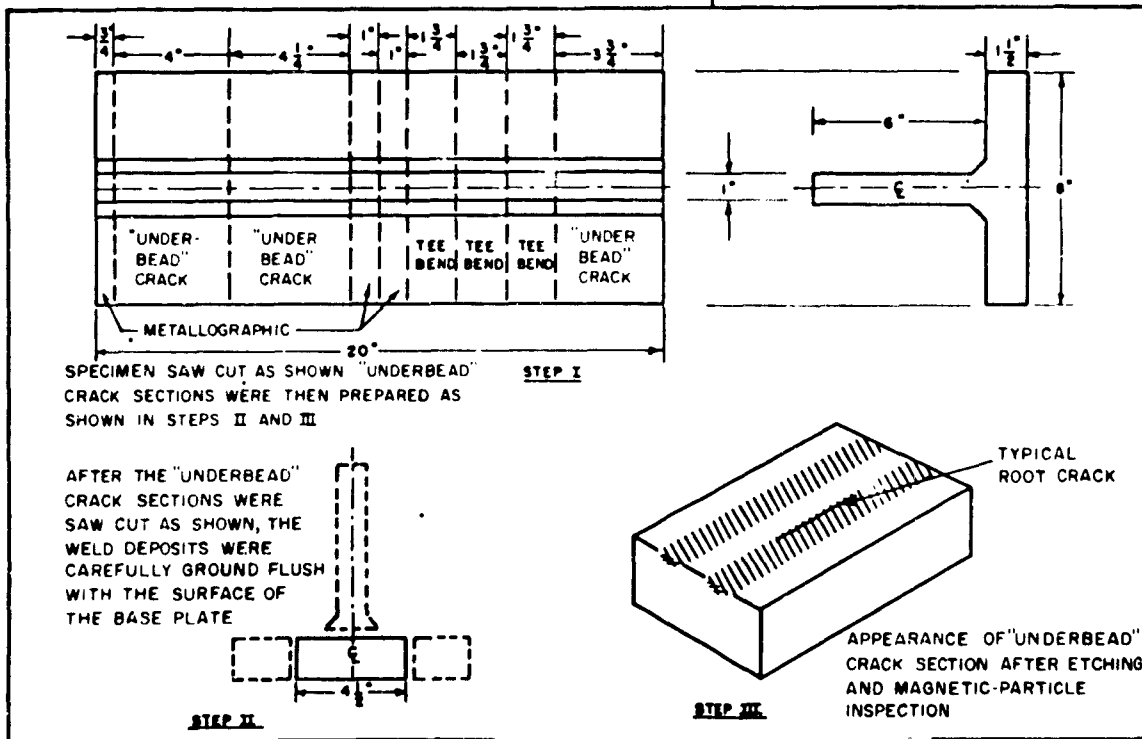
Details of Sectioning and Inspection Procedure for Multiple-Pass-Welded Tee-Shaped Specimens
